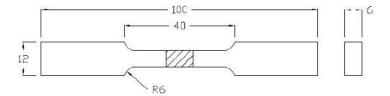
Dimensions of tensile specimen (ASTM E08) (Units in mm)
